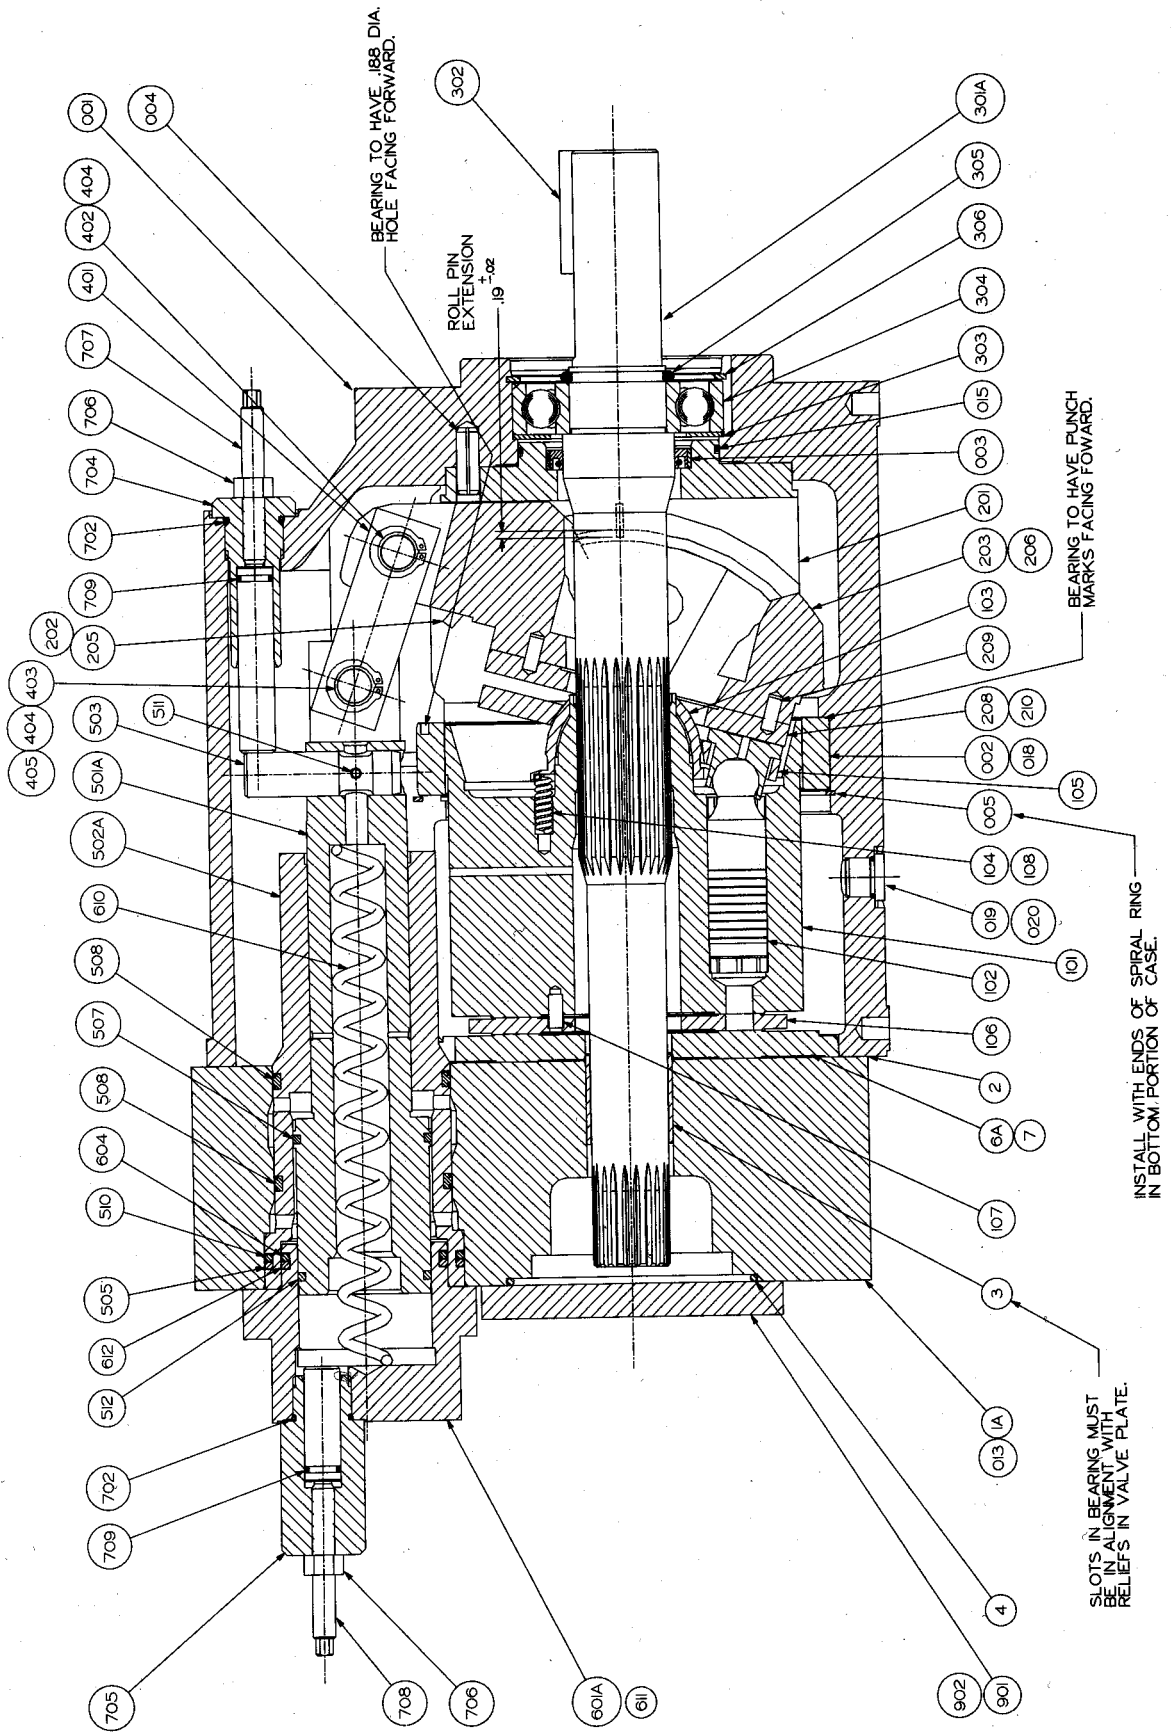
Cross Section Parts Drawing, Size 270 and 370 (515915-001).
